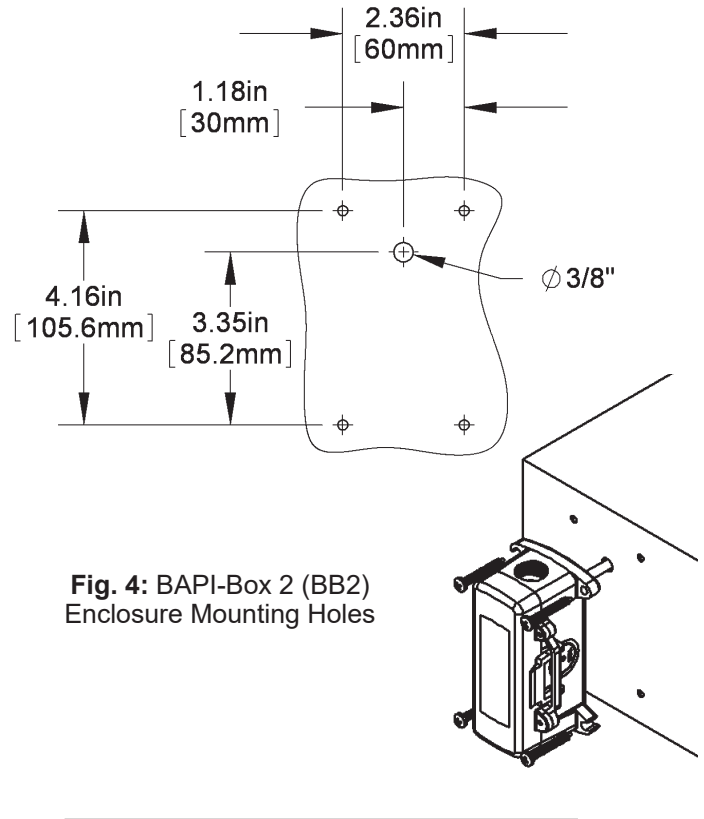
BAPI-Box 2 (BB2) Enclosure Mounting Holes
